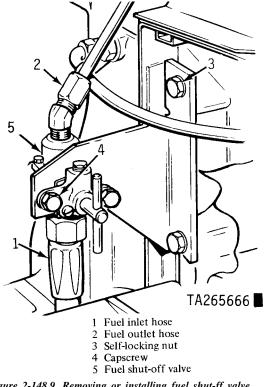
Removing or installing fuel shut-ff valve b. Installation.
